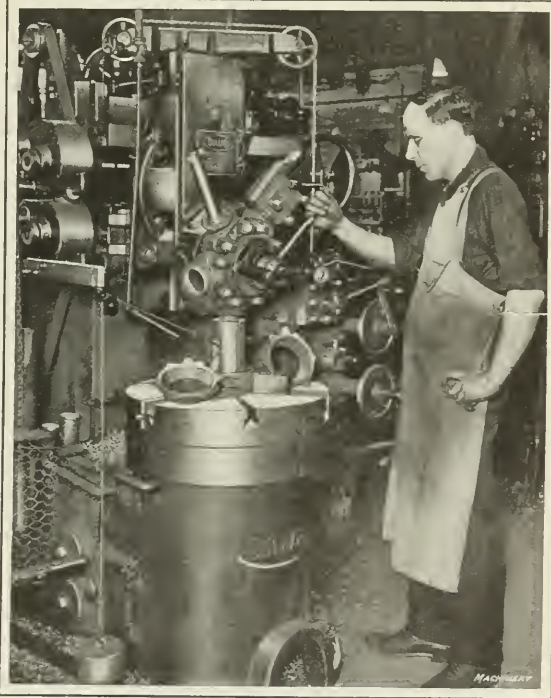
Bullard Vertical Turret Lathe tooled up for turning Socket of a Ball and Socket Joint
